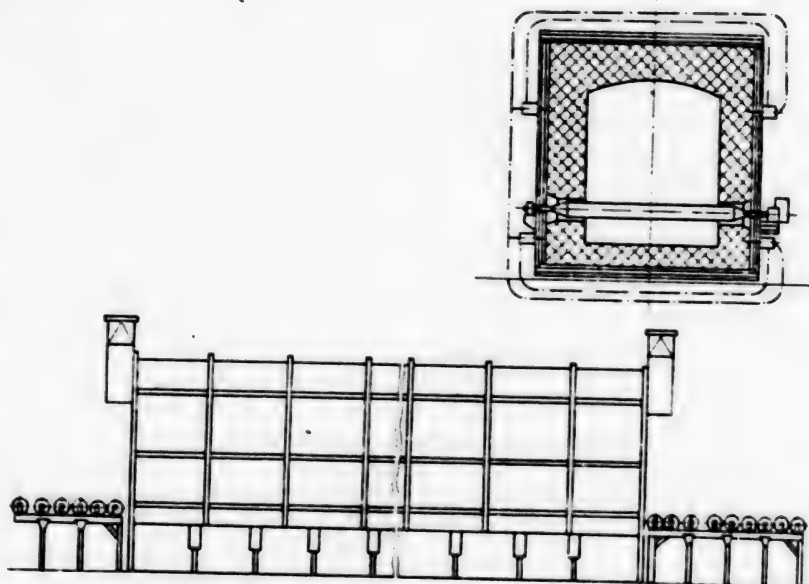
A roller hearth furnace operating without a protective atmosphere
